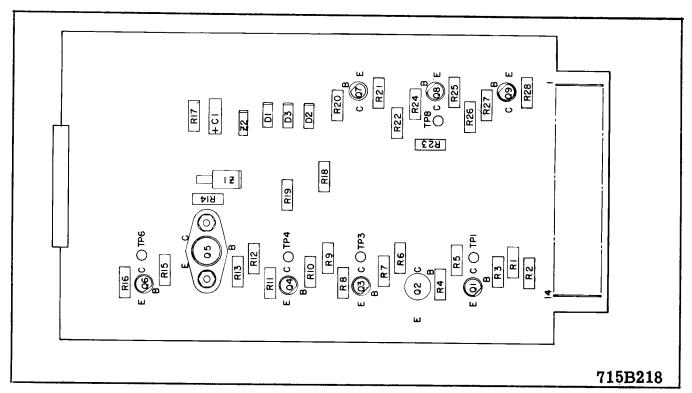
Component Location Channel Supervision Board - TCF Channel.
